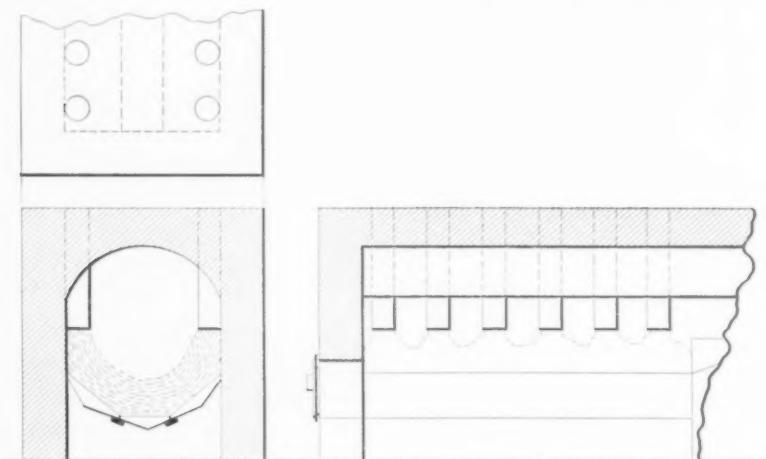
BUSH TAN FURNACE WITH MULTI-TUBE FEED.
